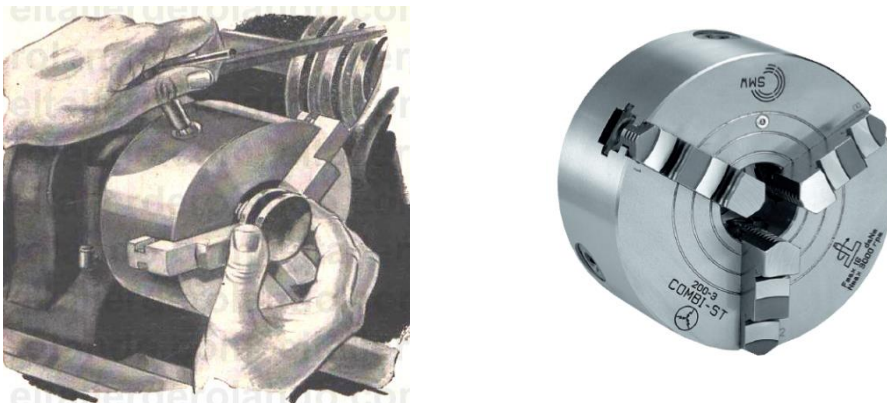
Left: The installation of the work-piece into the clamping device (Woodson, 2012).
